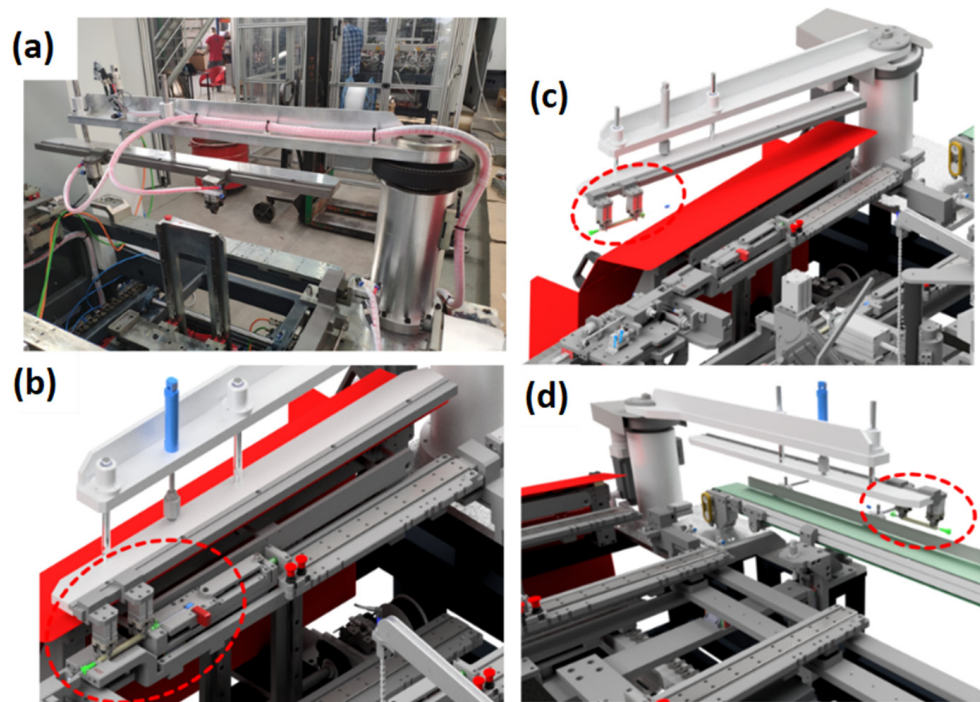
(a) Extraction and sorting workstation, (b) Bowden cable being collected, (c) cable being placed into a NOK box, and (d) cable being transported and placed into the OK box.
